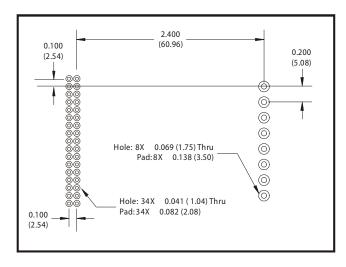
IM483-34P1-8P2 PCB Hole Pattern
